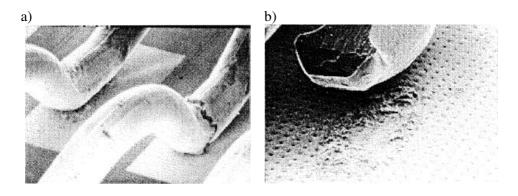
Failure mechanism in wire bonding: a) "heel cracking", b) bond wire "lift off"
